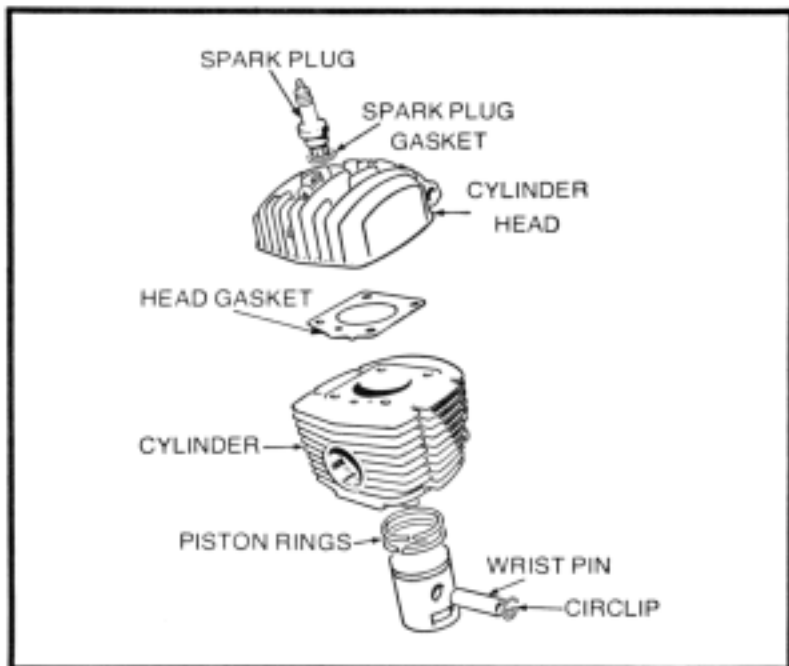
The Motobecane upper engine assembly—typical of mopeds.
